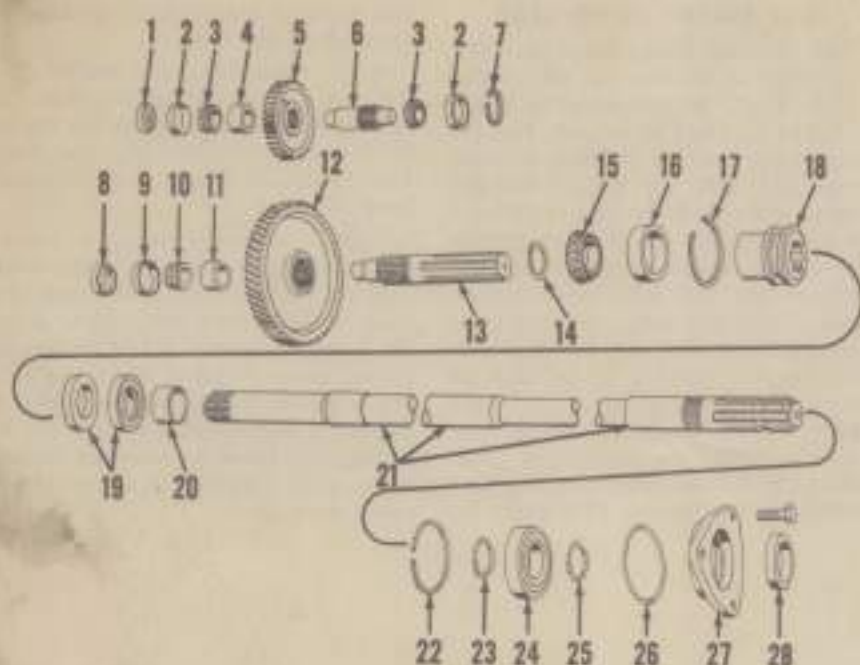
Exploded view of the Power Take-Off assembly. Adjustment of bearings (10 and 15) is controlled by the thickness of snap ring (17); the adjustment of bearings (2) is controlled by thickness of snap ring (7).
